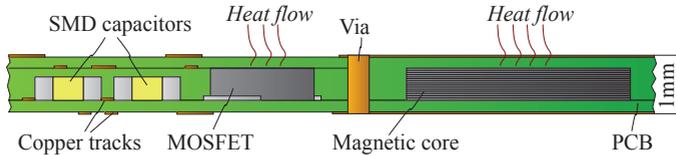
Cross-section of a PCB with integrated components; the transformer core, SMD capacitors, and power MOSFETs, e.g. Thin-PAK package [56], are embedded in the PCB which allows for ultra-flat systems.
